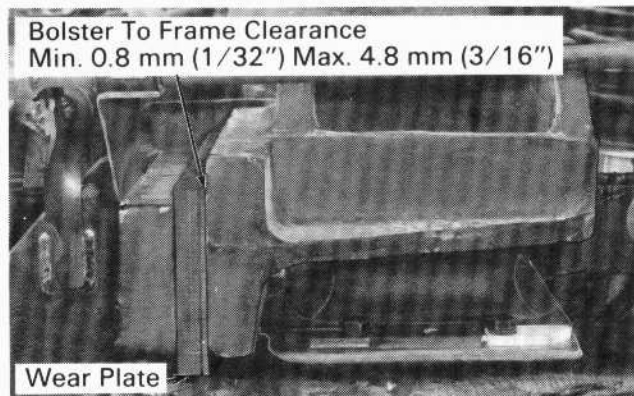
Side Bearing Wear Plate Clearance (Trucks Built Prior To 1977)
